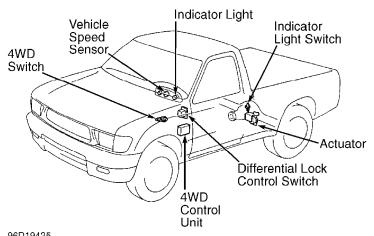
Location Of Rear Differential Lock System Components Courtesy of Toyota Motor Sales, U.S.A., Inc.
